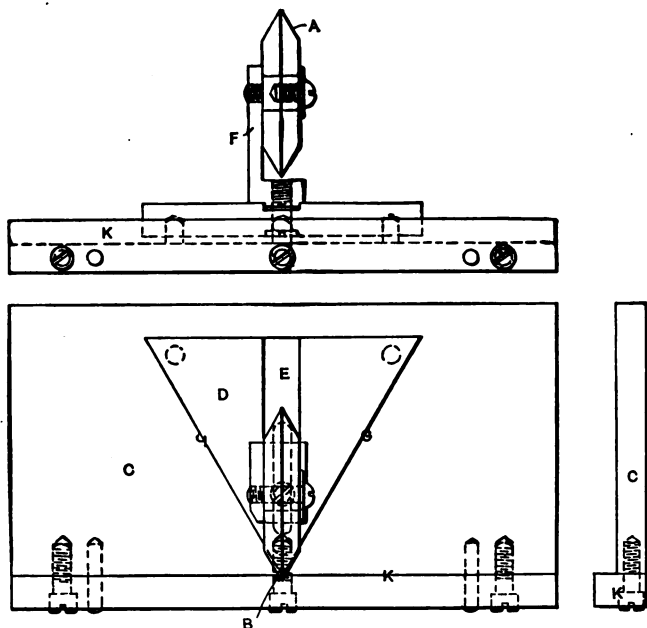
Simple Fixture for Grinding Angular Milling Cutters
